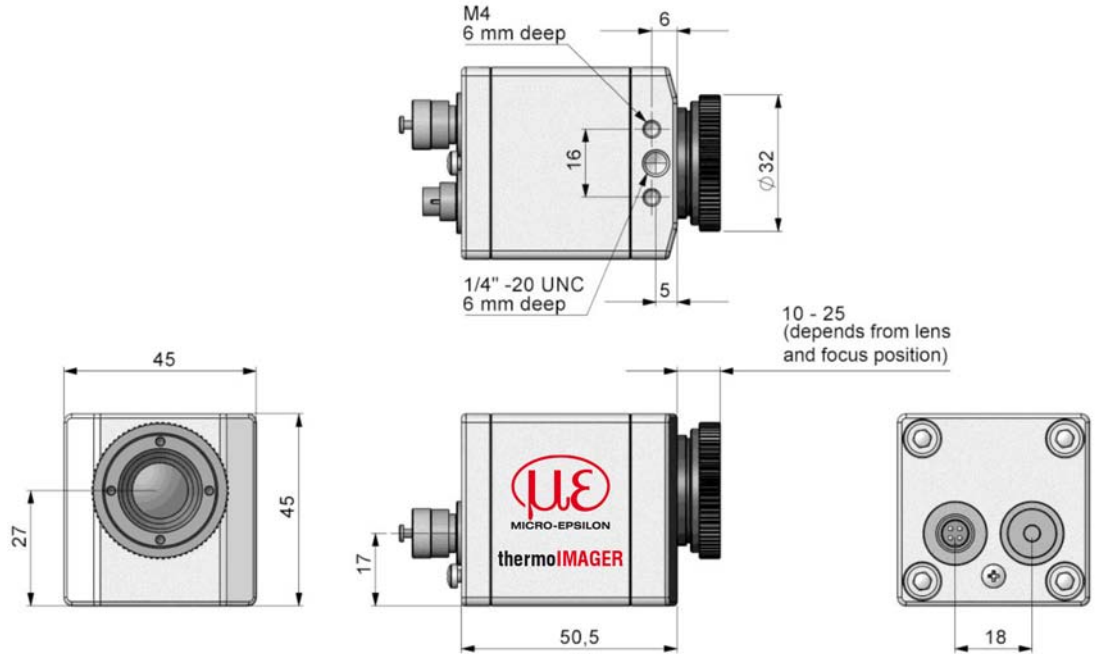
Dimensional drawing TIM 160, dimensions in mm, not to scale
